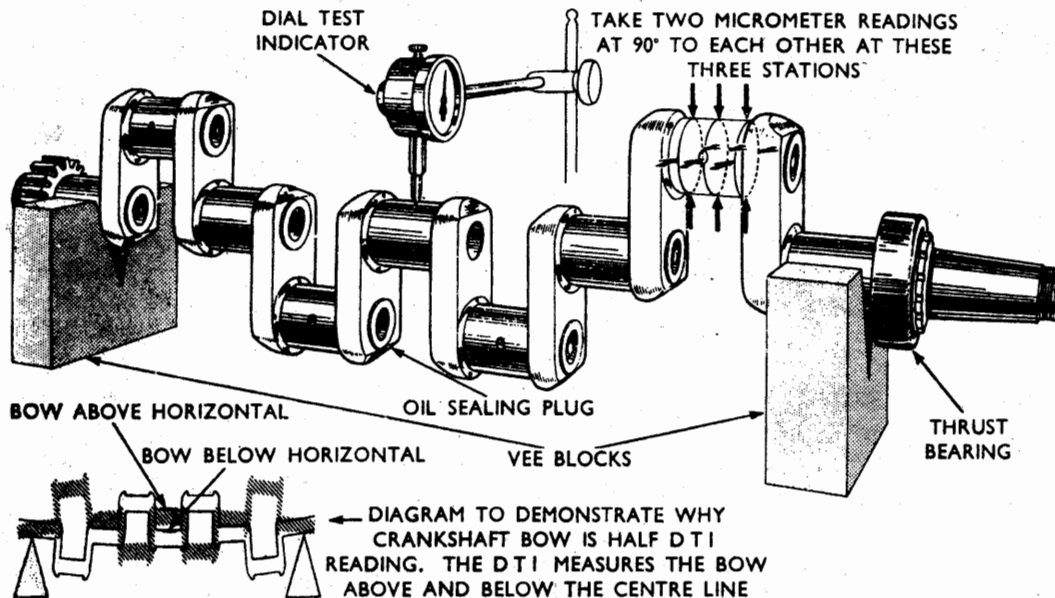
CHECKING A CRANKSHAFT FOR WEAR AND BOW
